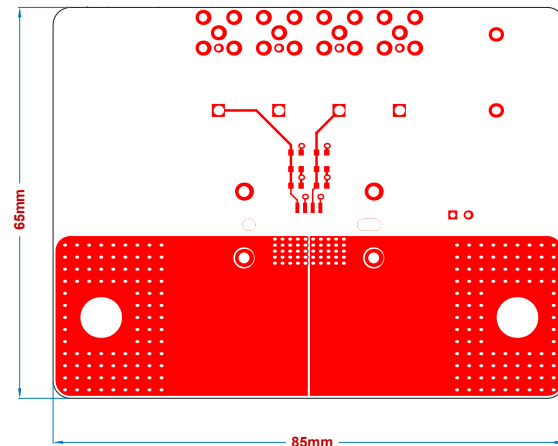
LC/LZ PCB Layout Reference View With Vias-in-Pad
